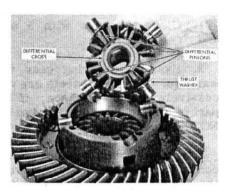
Differential Cross, Pinions and Thrust Washers Removal or Installation
